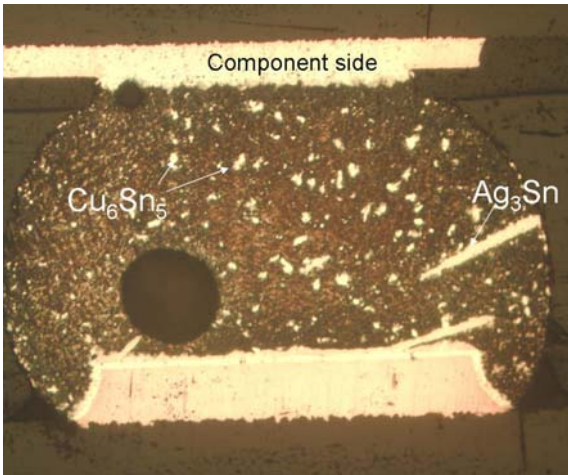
Presence of IMC in bulk solder of non-aged lead-free solder joint (Etched solder joint)
